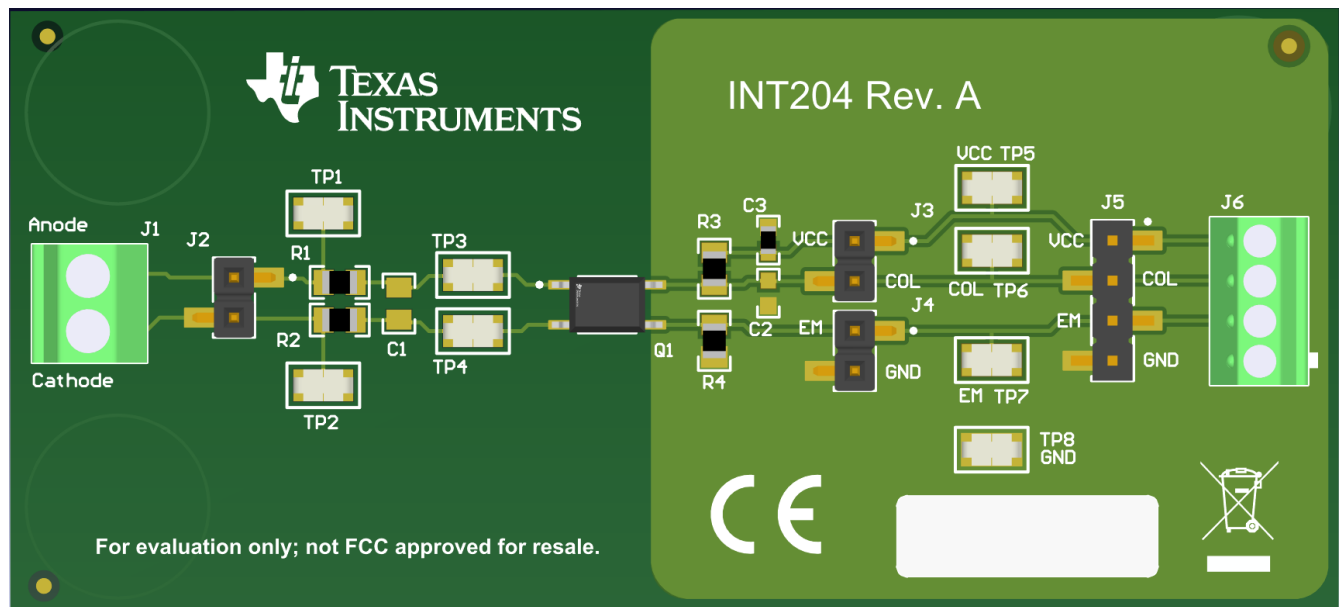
Layout Example of ISOM8110-EP With a Single Layer Board
